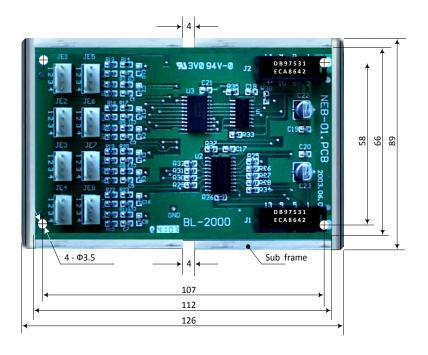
CALL EXTENSION BOARD BL2000-CEB SHAPE & DIMENSION
